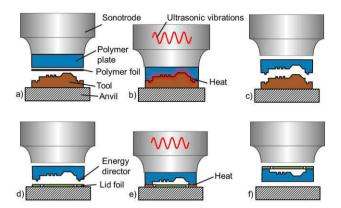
Schematic drawing of the fabrication of a microchip by ultrasonic hot embossing and welding.
